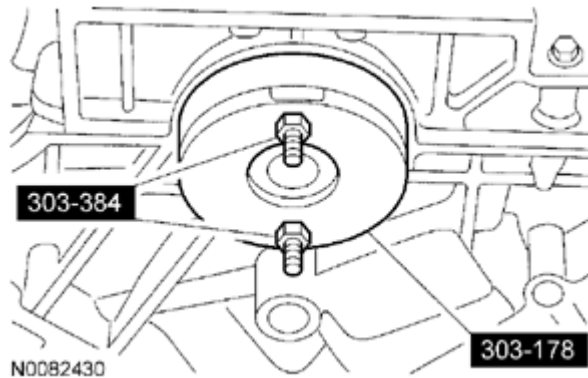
Installing Rear Main Oil Seal Using Crankshaft Rear Main Oil Seal Installer And Crankshaft Rear Main Oil Seal Installer Bolts
